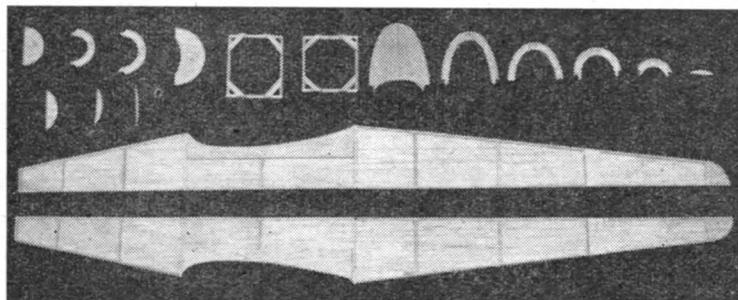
Fuselage frame sides, key frames and formers ready for assembly.
